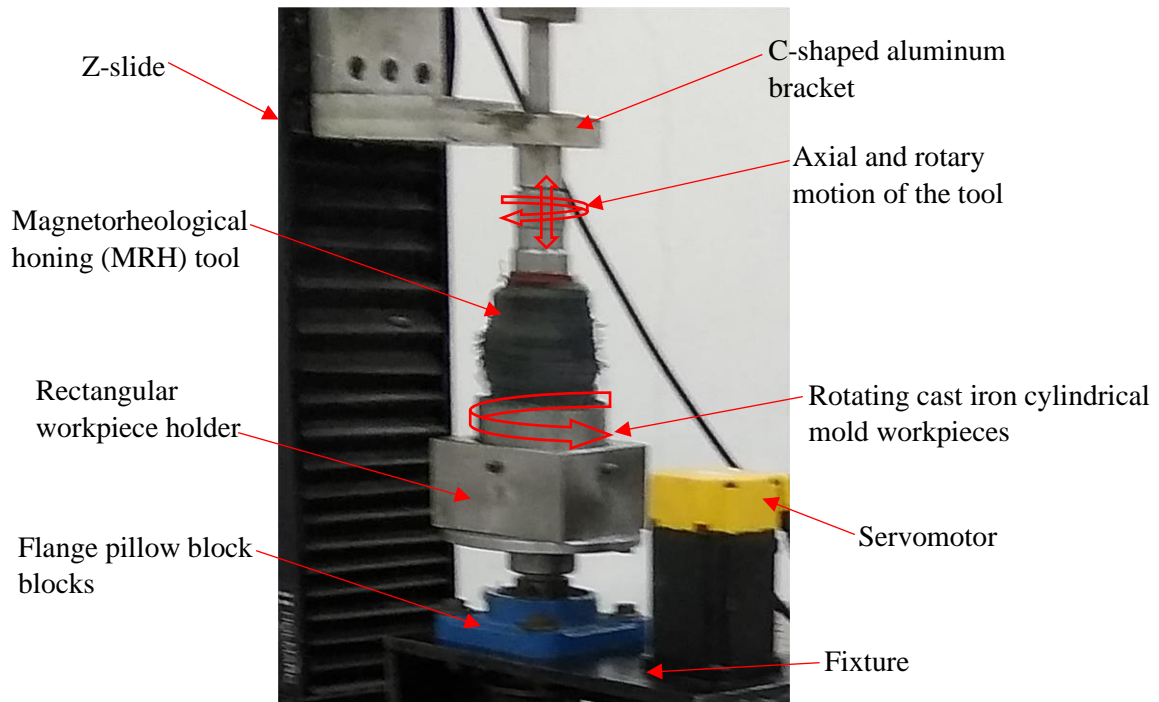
Rotational magnetorheological honing (R-MRH) process for finishing the internal surface of the cast-iron cylindrical mold.
